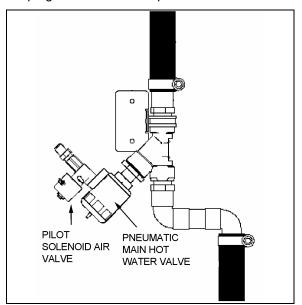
PASSENGER'S UNIT HOT WATER PNEUMATIC VALVE ASSEMBLY
